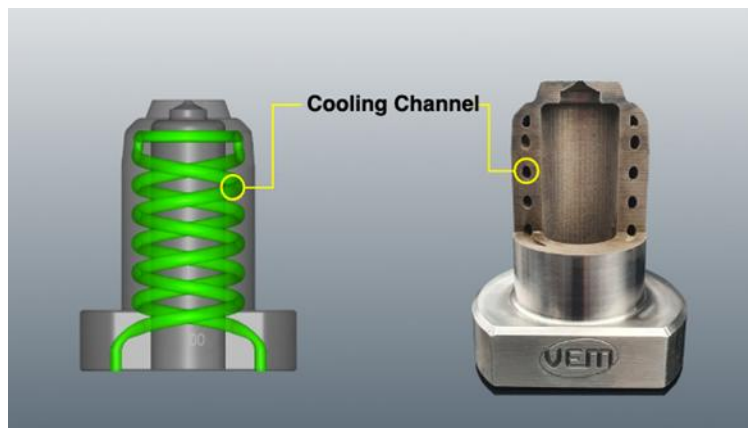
3D printed mold bushing with internal cooling channels not possible to create with traditional manufacturing⁷⁵
